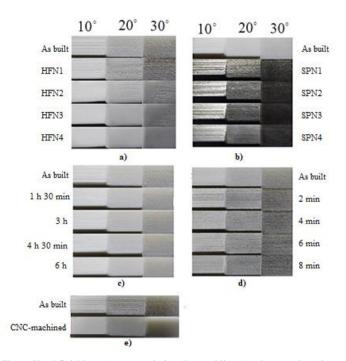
Hand finishing (a), spray-painting (b), tumbling (c), shot-peening (d) and CNC-machining (e) improvement of surface finish of nylon test pieces
